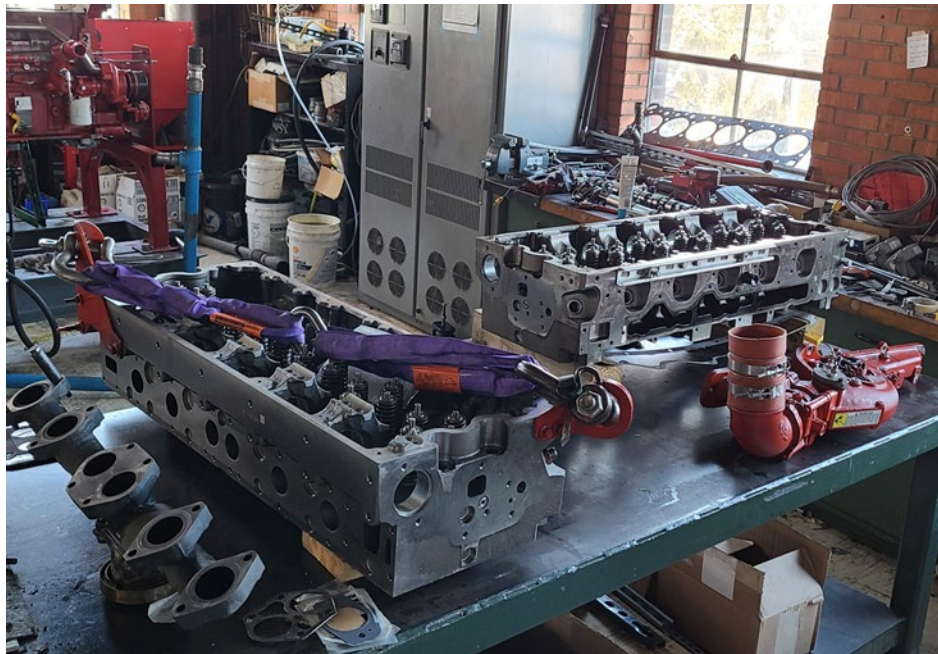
Engine cylinder head and manifolds swap in progress
